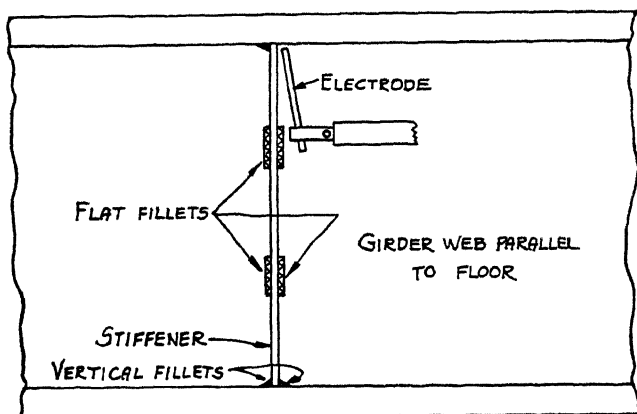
Position for welding thin web stiffener to thick flanges.
